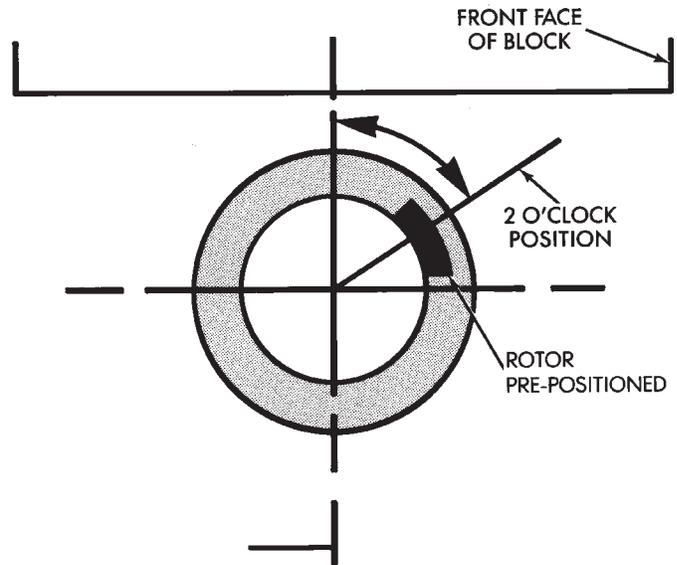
Align Oil Pump Gear Slot—2.5L Engine
